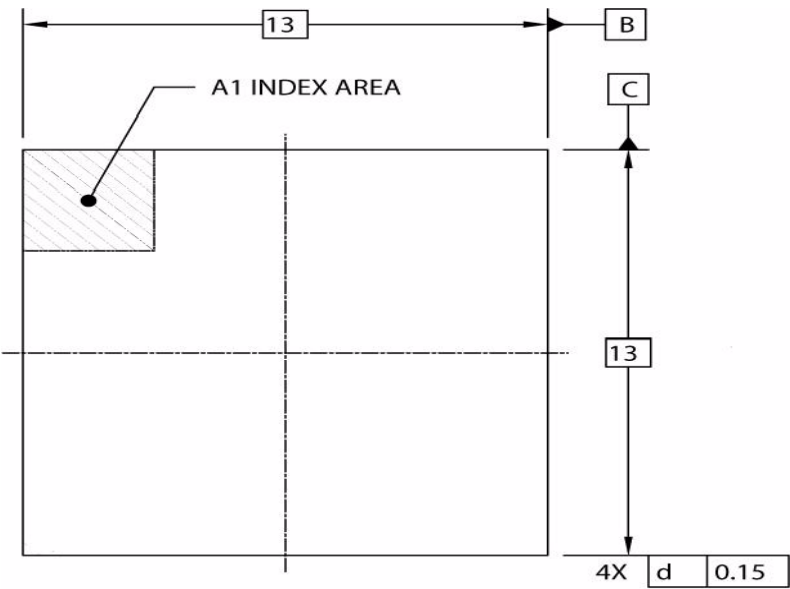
416 MAPBGA 13x13 mm Package Top View
